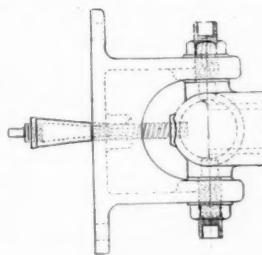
The brake countershaft assembly in which oil is employed as a lubricant
